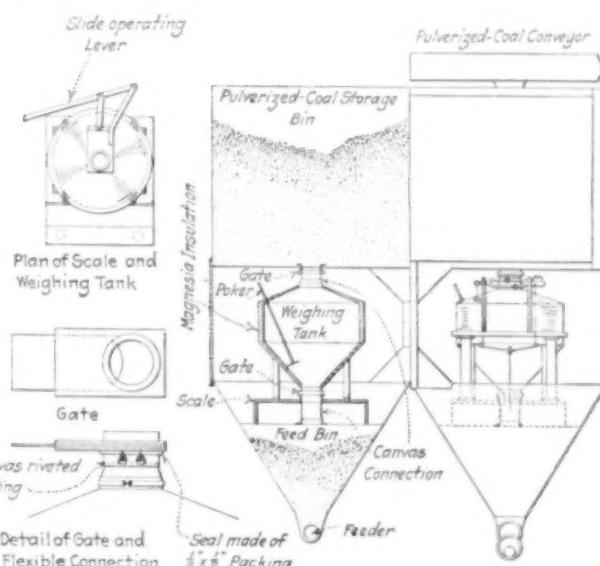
COAL-WEIGHING APPARATUS USED IN TESTS
